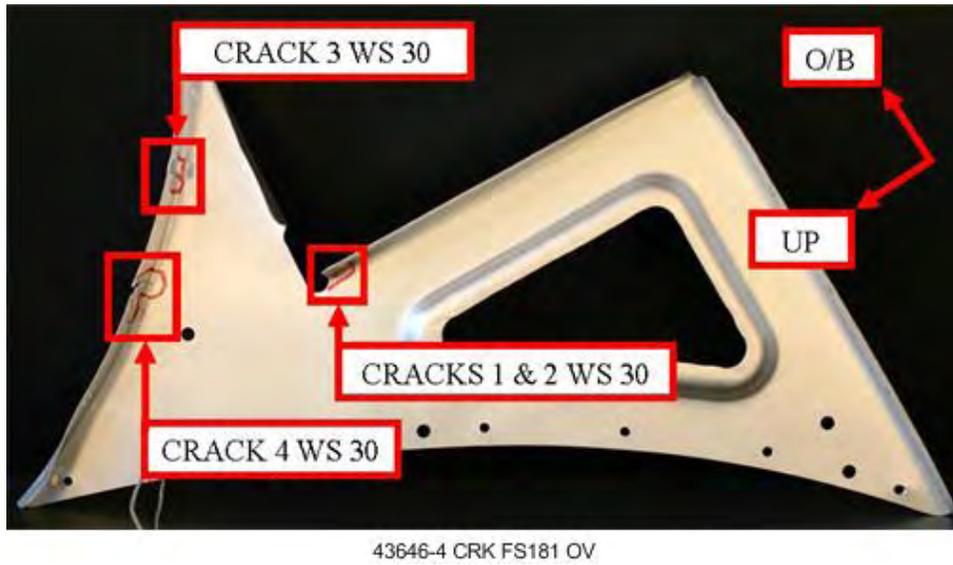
Location of Cracks on the Left Wing Bulkhead Wing Fillet WS 30 FS 181
